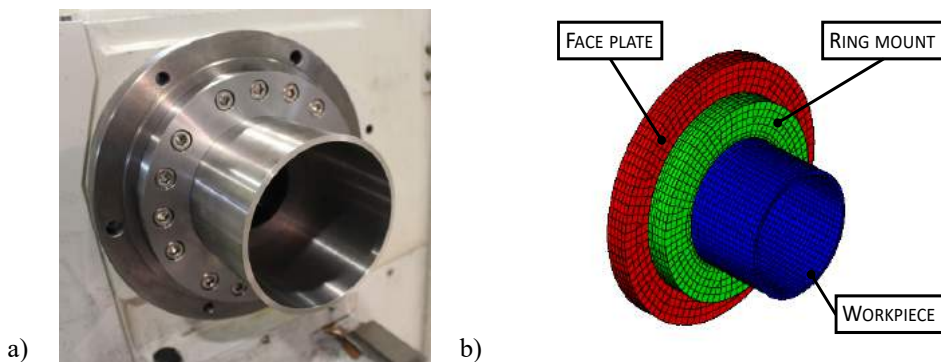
a) Workpiece fixed to the lathe b) workpiece model
